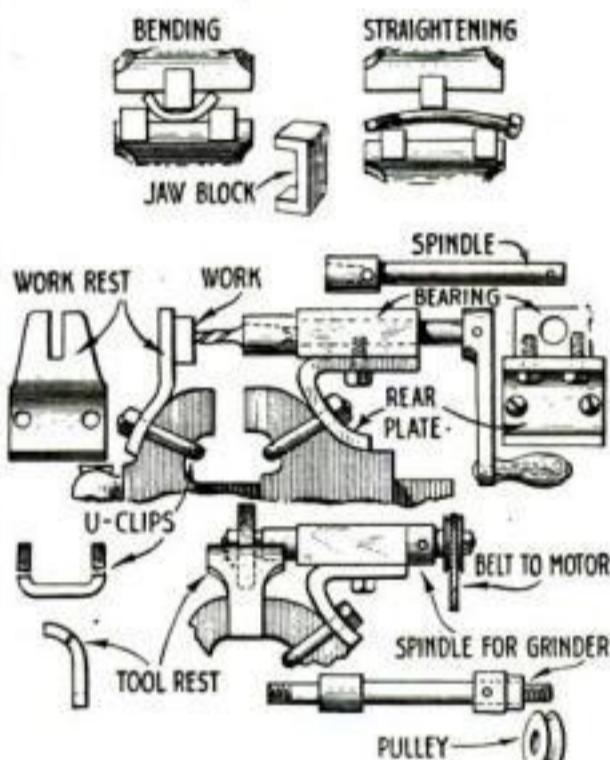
Vise blocks for bending and straightening and special fixtures for drilling and grinding
